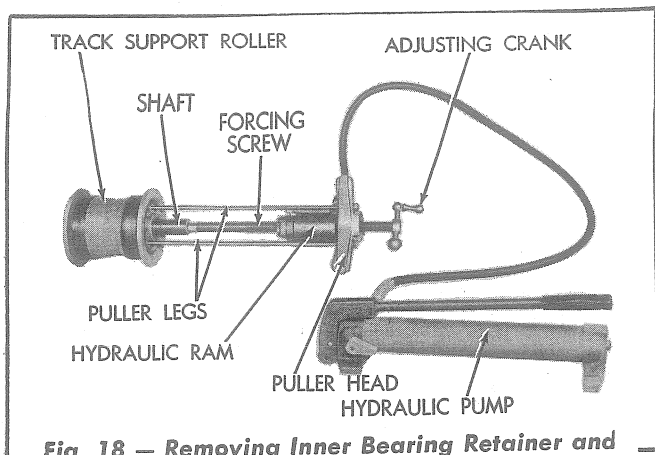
Removing Inner Bearing Retainer and Seal Retainer from Track Support Roller
